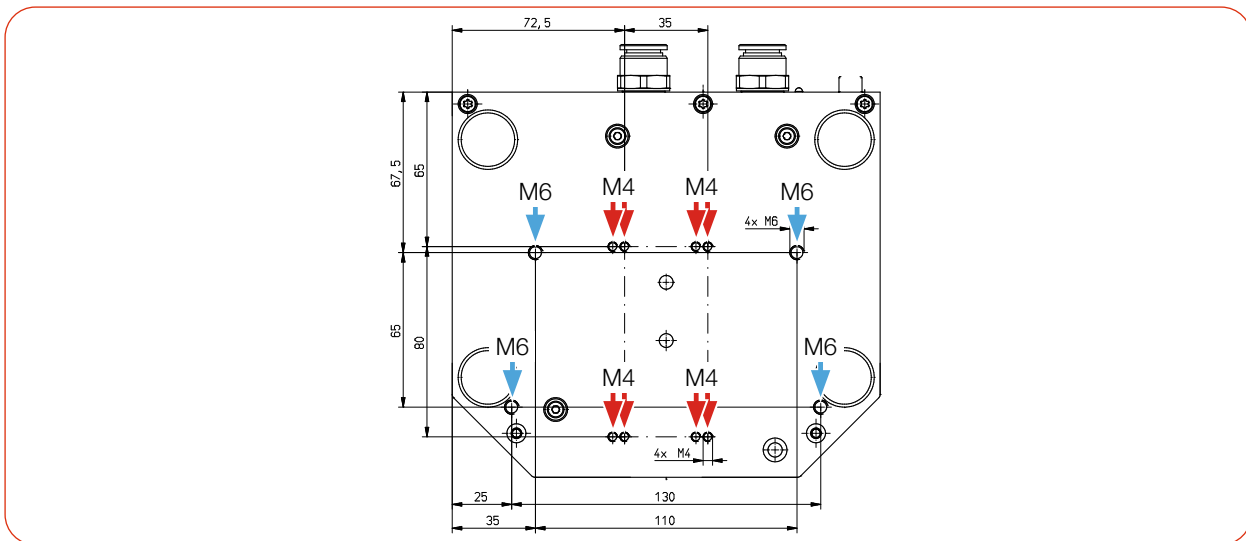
Mounting threads M4 and M6 in the bottom of the housing of the CPM F-10 (dimensions in mm)
